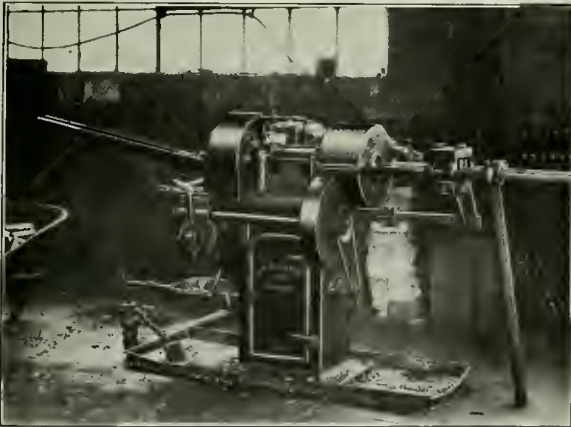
Automatic Machine for Cutting Safe Ends Reduces Labor in the Flue Shop
